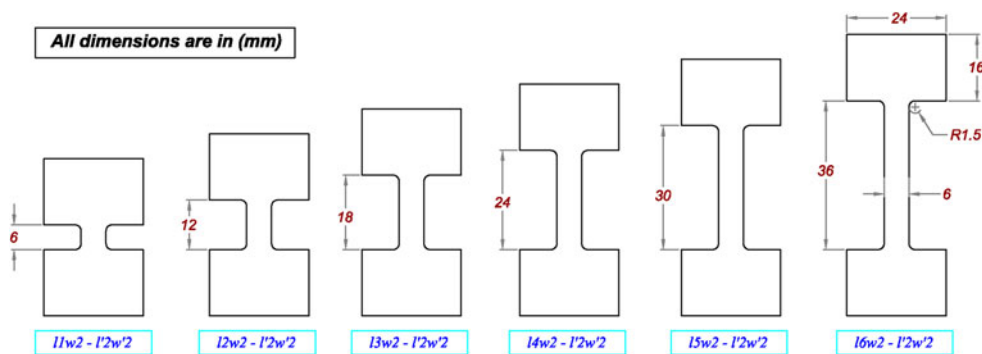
Six identical specimens except for the gauge length changing between 6 and 36 mm (the gauge width is 6 mm)
